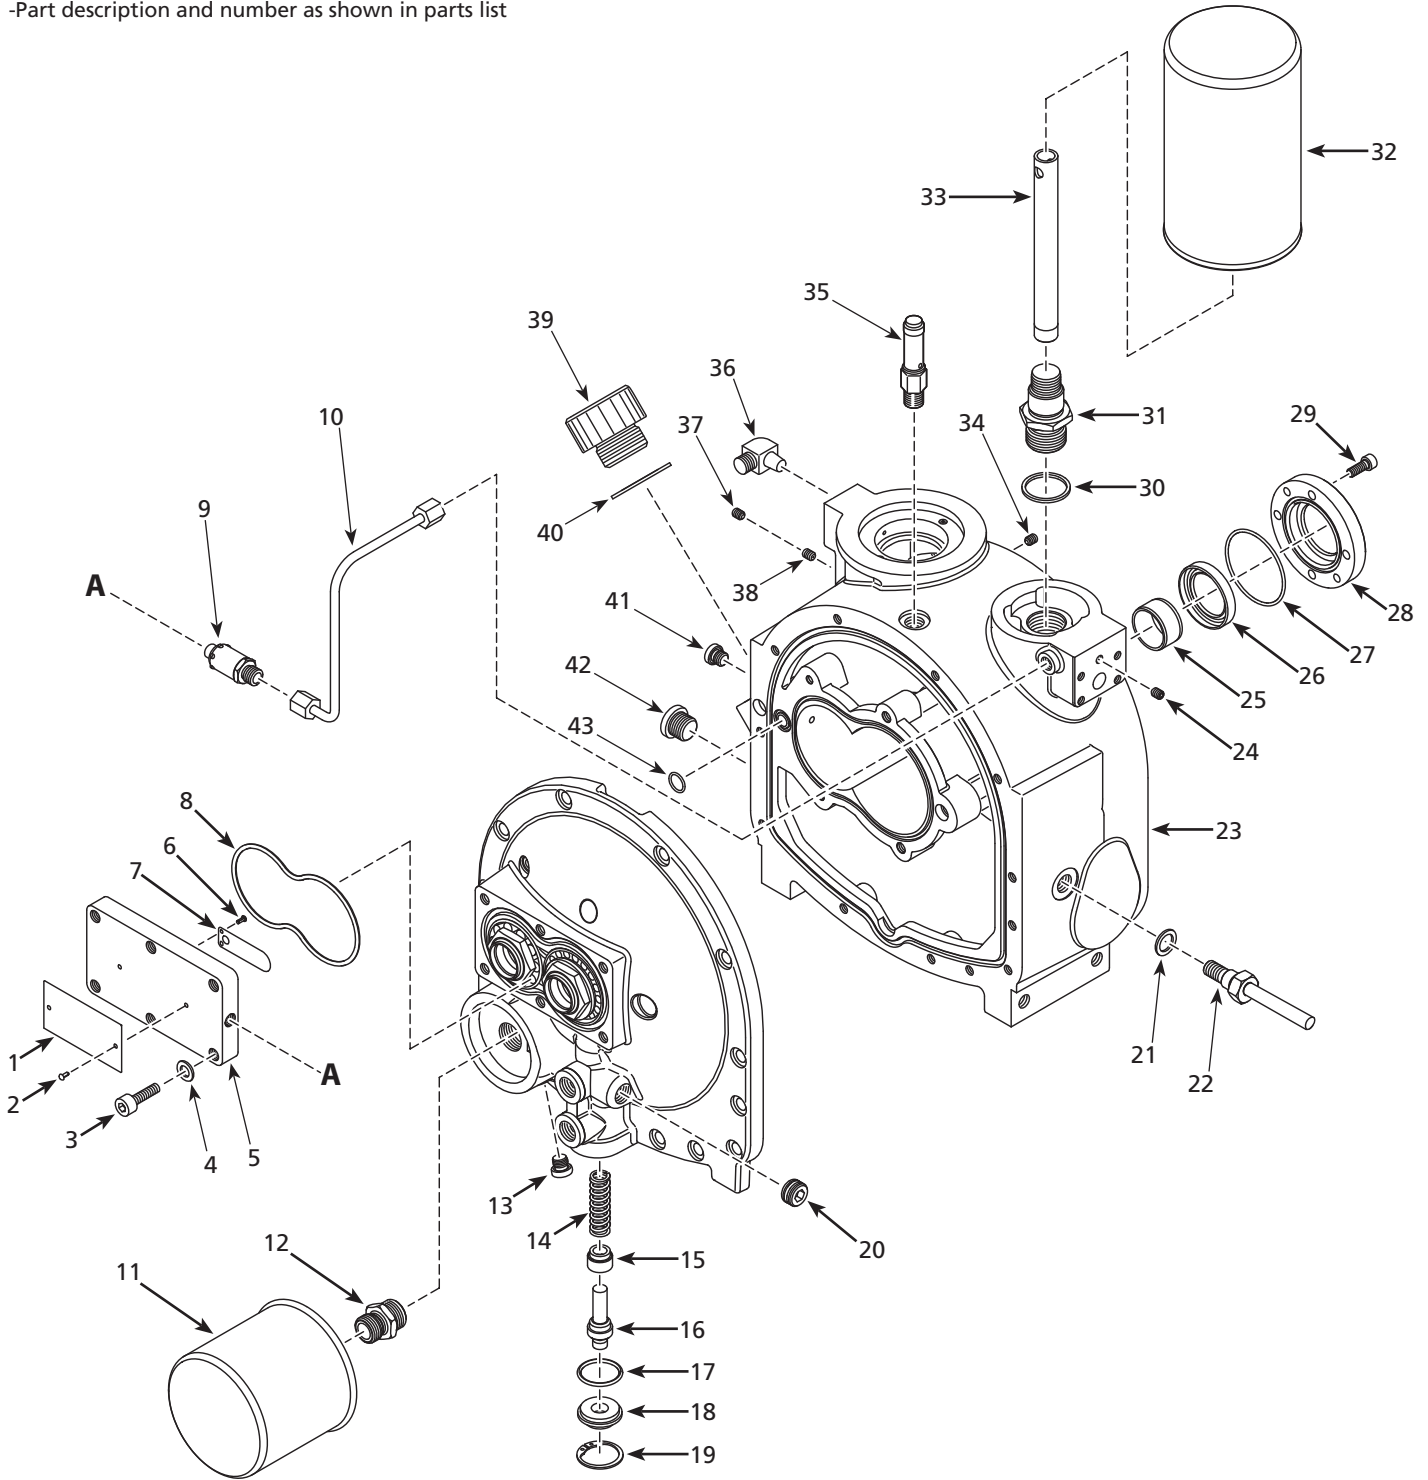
Repair Parts Illustration for 5 HP - 10 HP Rotary Screw Air End Assembly
